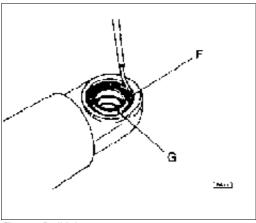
Ball joint. F Circlip G Ball joint
